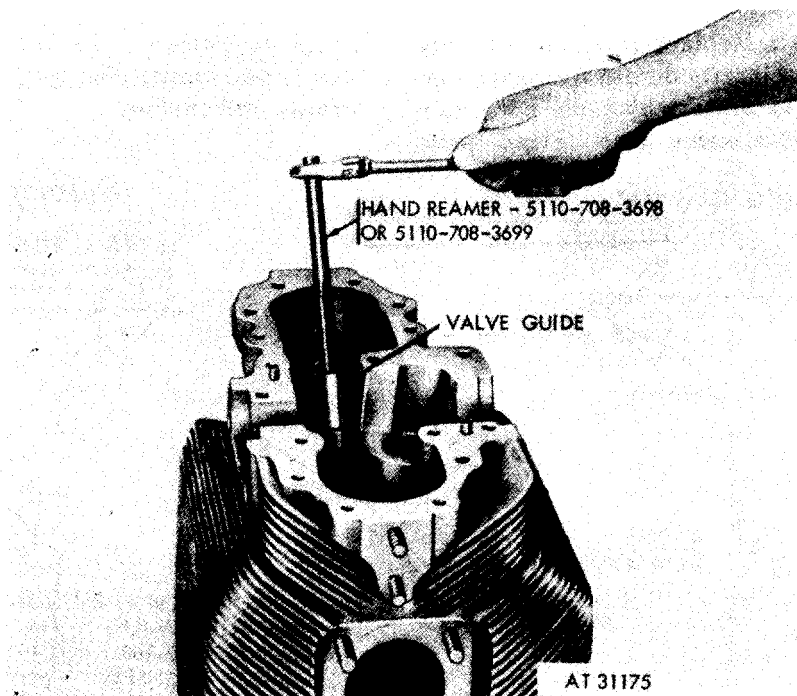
Reaming intake valve guide, using hand reamer - 5110-708-3598 or 5110-708-3699 and reamer bushing - 4910-795-7950.
